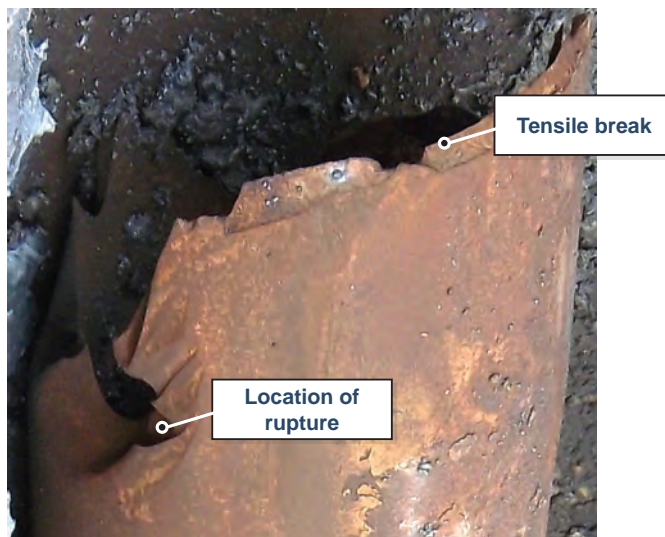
Failed End of Drill Pipe – Top of Section EE-3 Showing Location of the Rupture and the Tensile Break
